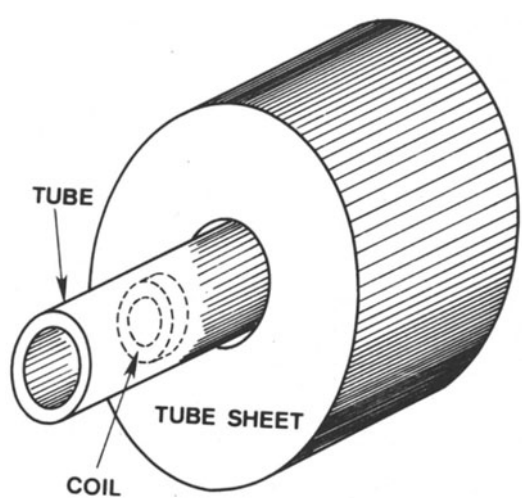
An Inconel 600 tube section inside the carbon steel tube sheet.
